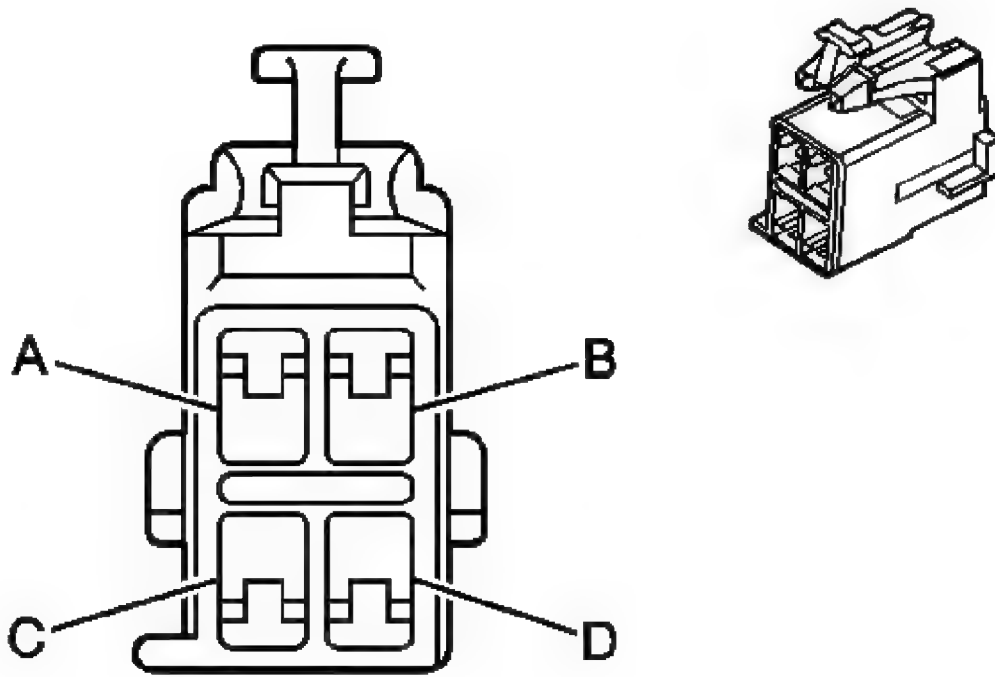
Driver Seat Lumbar Massage Motor C1 (A45) Connector End View
